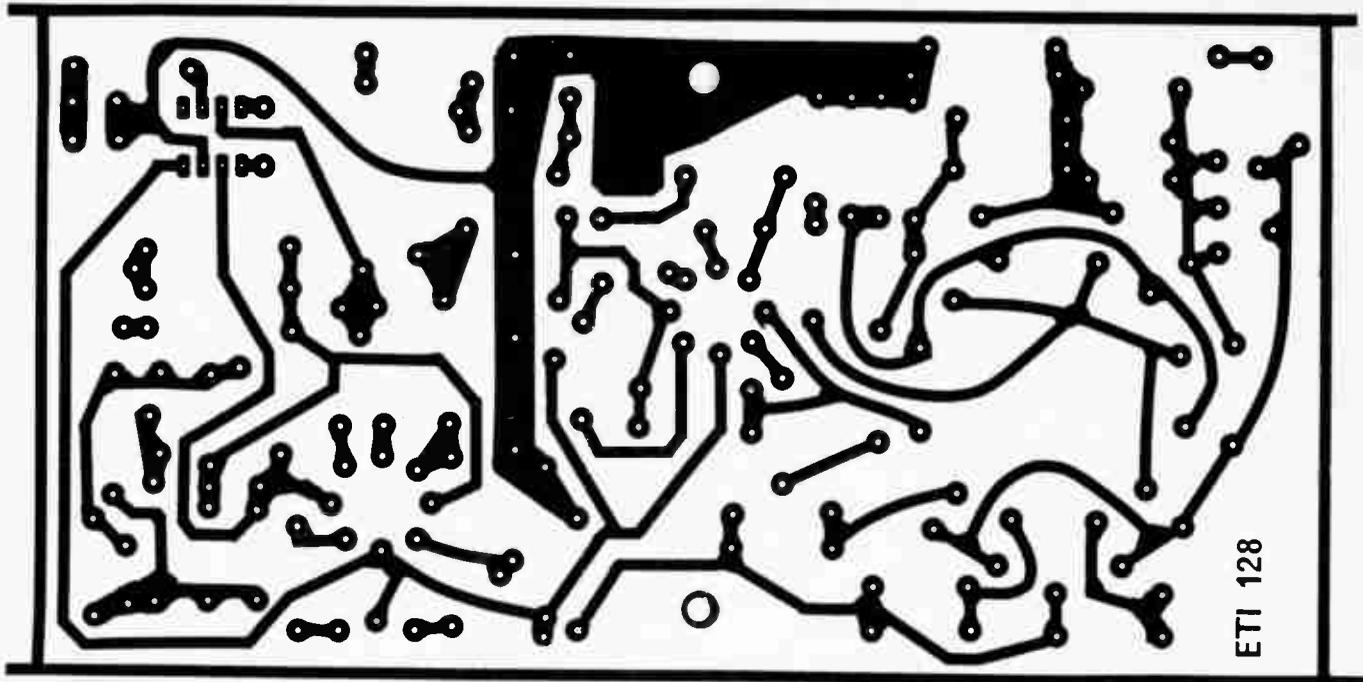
Printed circuit layout. Full size 170 x 87 mm.
